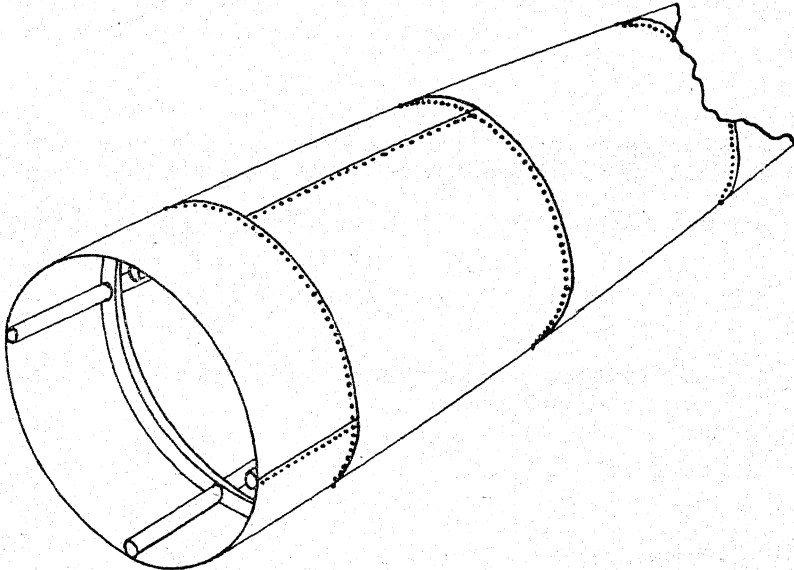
Proposed arc welded fuselage construction. Skin screwed to arc welded tubular transverse frames—air intake forward.
